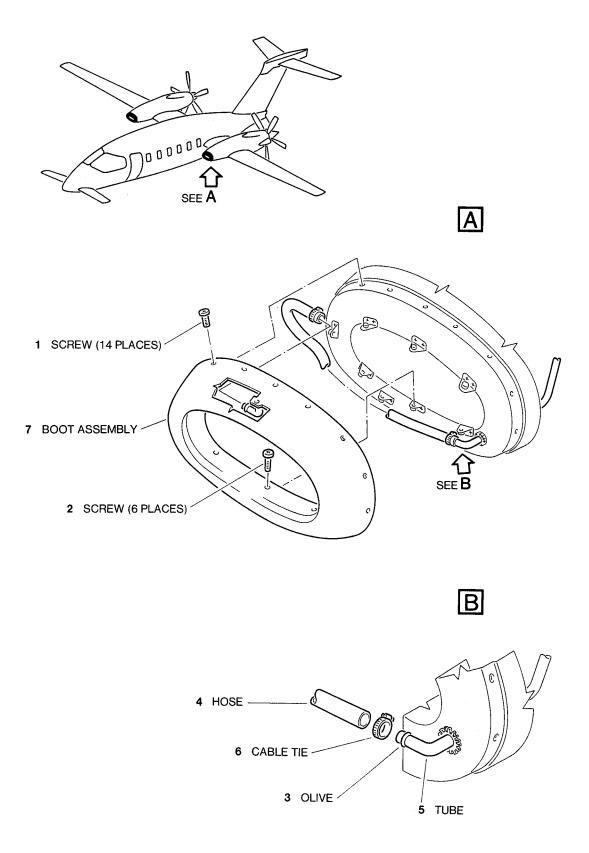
Engine Air Intake Boot - Removal/Installation
